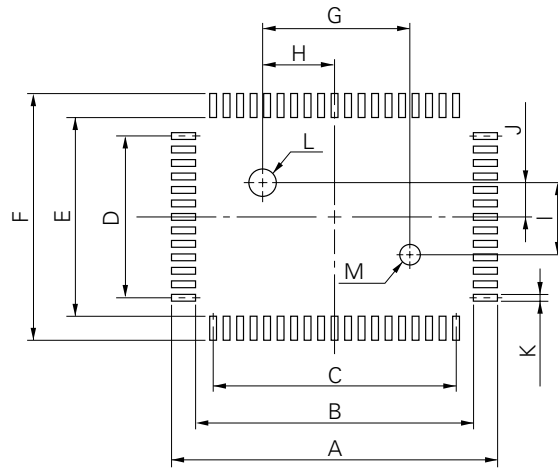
Drawing of Conversion Socket (EV-9200G-64)
